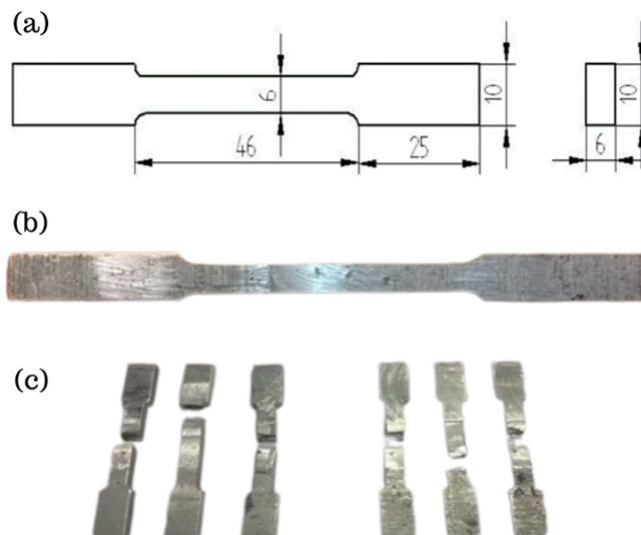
Tensile test specimen: (a) standard dimensions used for specimen preparation; (b) sample tensile specimen; (c) fractured tensile specimen.
